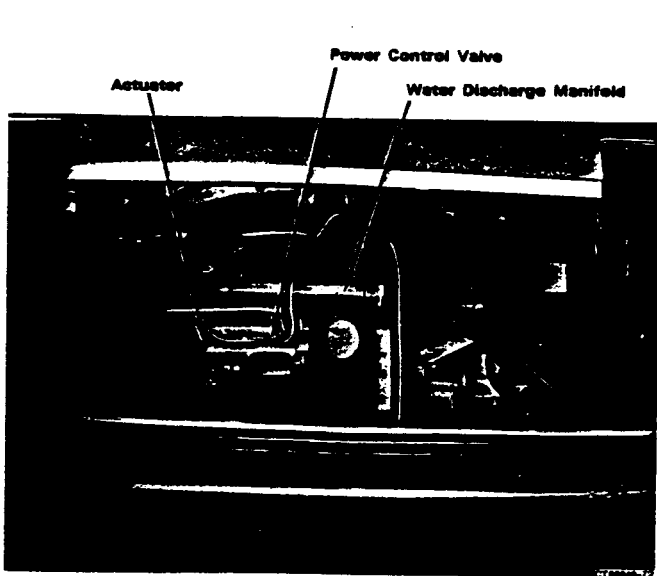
Lower Front View of Mod II SES Mock-Up Installation in Celebrity
